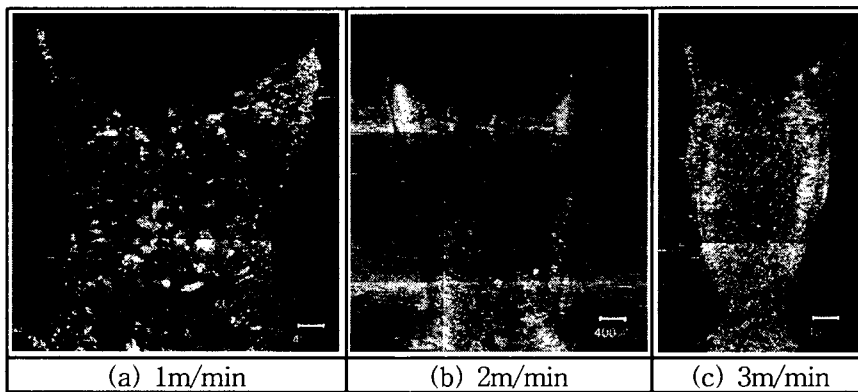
Macrostructures of bead of joints welded with welding speed. (laser power:7kW)
